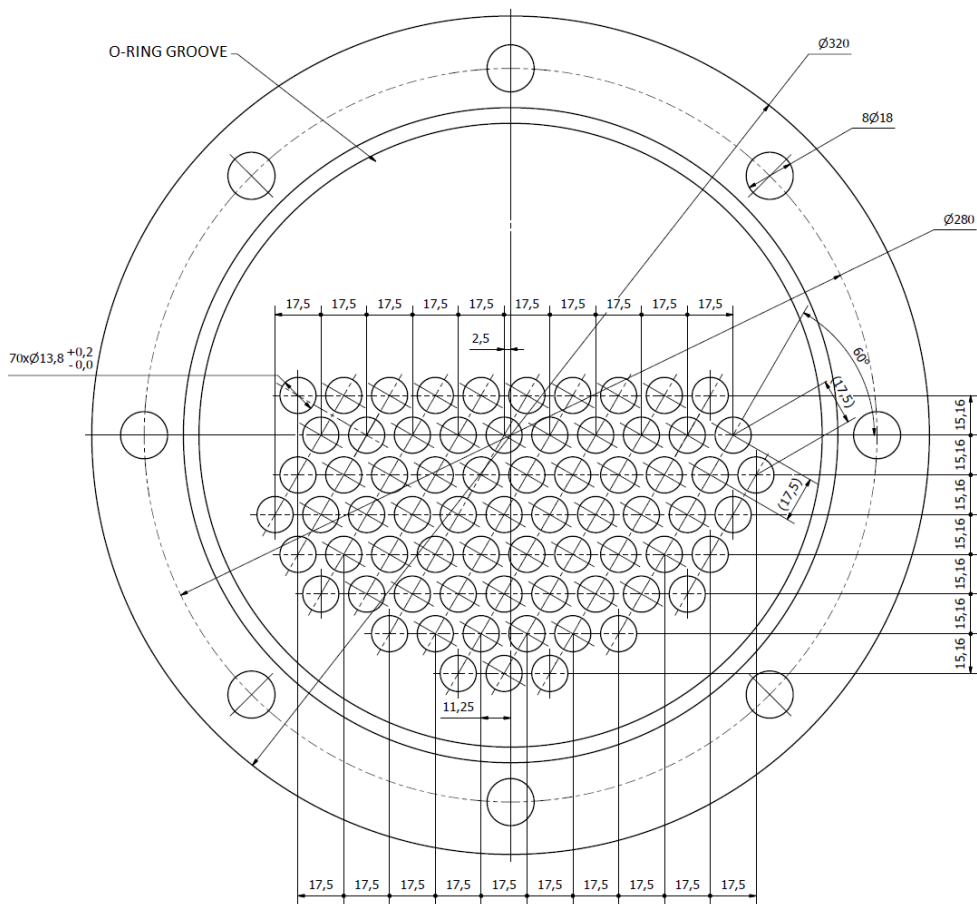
Tubes arrangement demonstrated on the flange cap of the desorber
